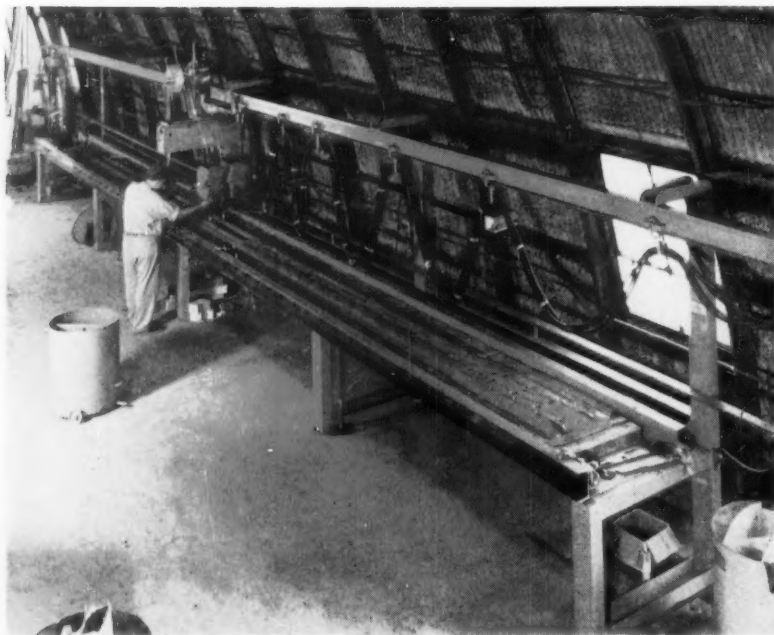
This track rail welder will completely rebuild worn tracks to their original dimensions with a new layer of super-hardened steel. Twin heads, welding simultaneously on each rail, insure equal deposits on both rail by controlled heat and rate of weld deposited.
